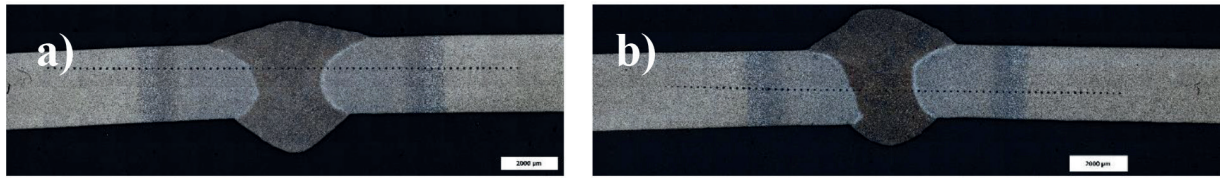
Macroscopic view of the weld A (a) and weld B (b)
